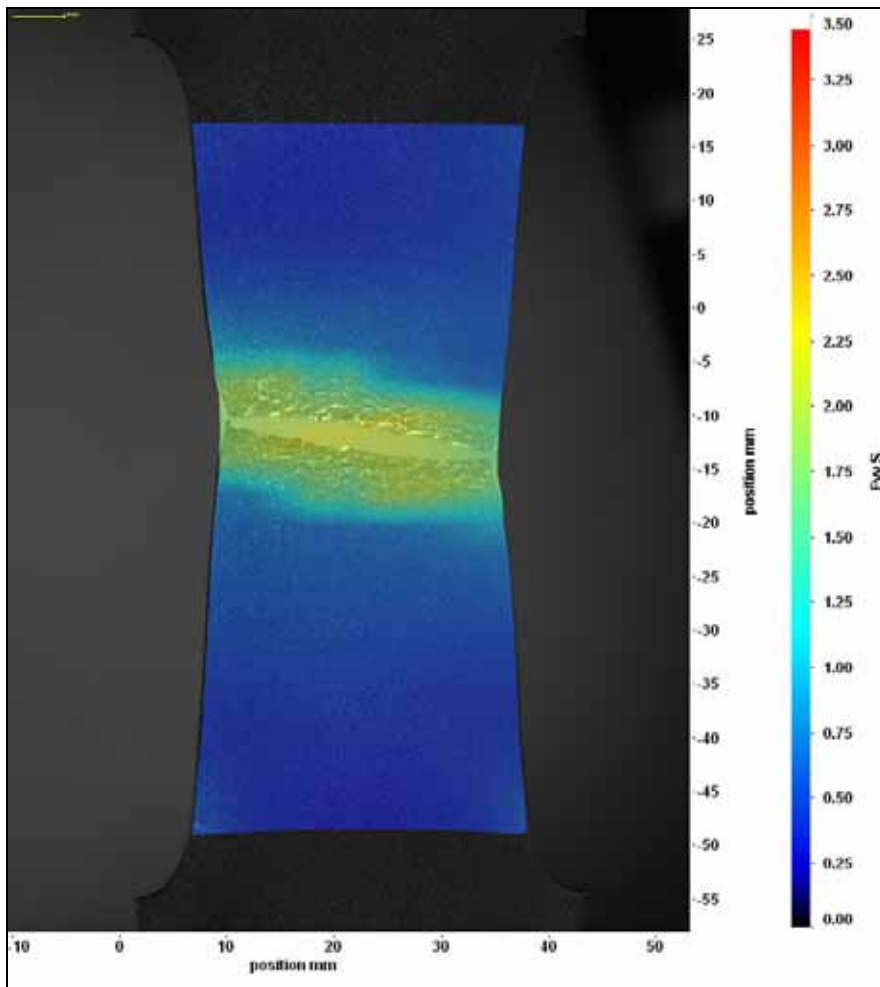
Strain map of an FSWeld. Lid material is on the top and tube material on the bottom. The fracture occurs in the weld closer to the lid material along a line of entrapped oxide particles.
